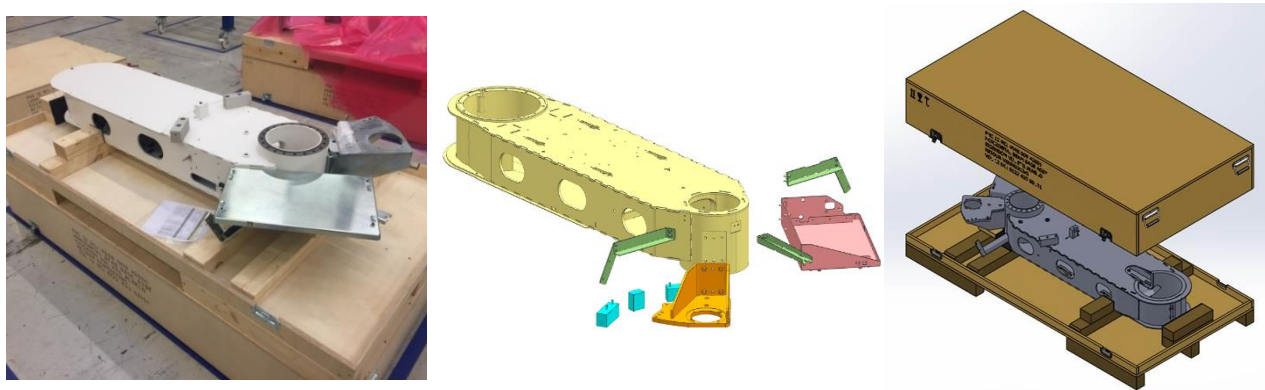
HB: Picture (Left), Exploded View (Middle), On Dedicated Pallet (Right)
